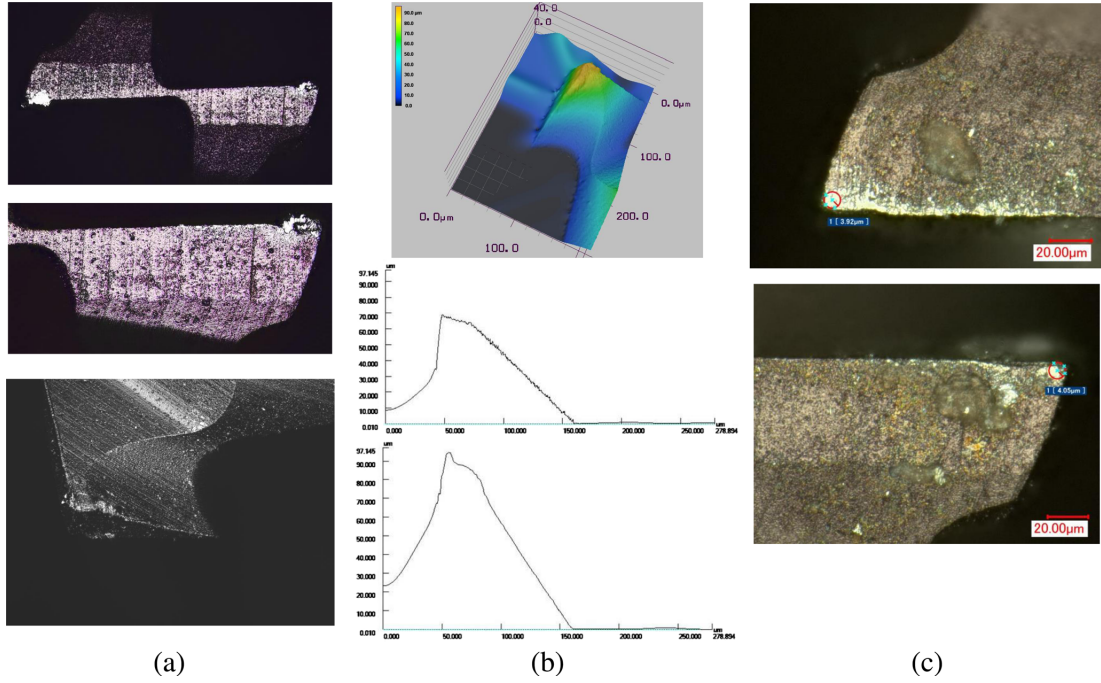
a.* Edge condition of the micro end mill after machining test. *b.* Edge profile of the cutting tool with and without BUE. *c.* Edge condition of the micro end mill after BUE was removed
